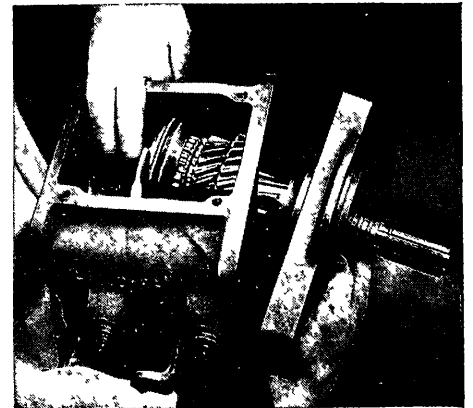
At this point, if repairs are to be made on the transmission, remove the mainshaft, adapter plate, gears and synchronizer as a unit
